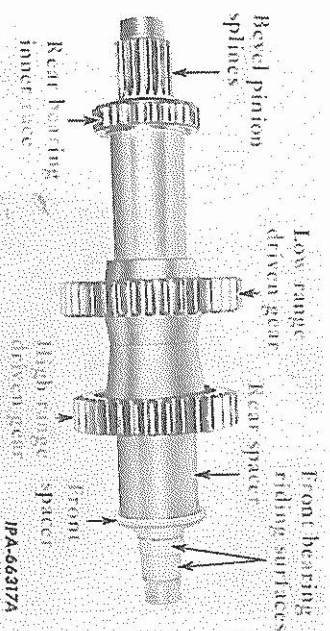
Bevel Pinion Shaft Assembly (EARLIER MODELS)
